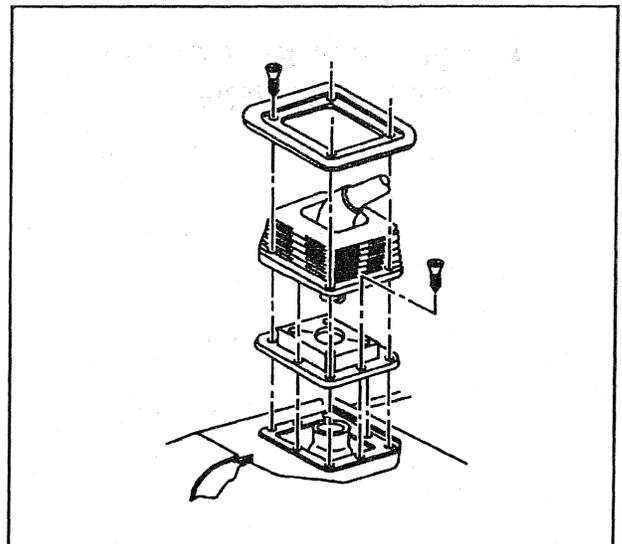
Shift Lever Boot (New Venture Gear 3500 and 4500 Transmissions)
